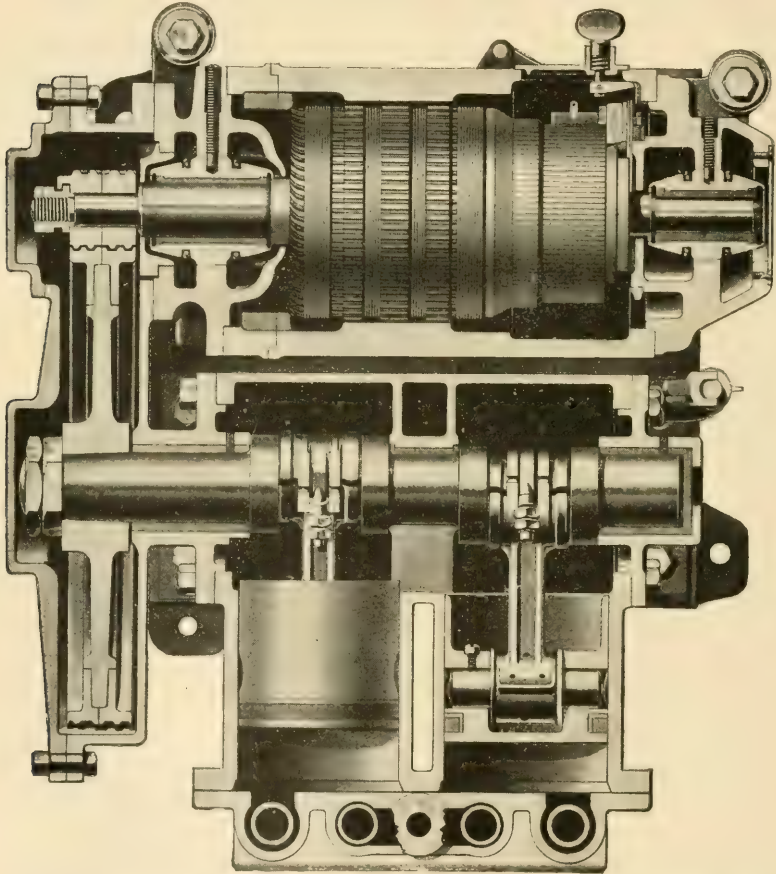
HORIZONTAL SECTION THROUGH A COMPRESSOR WITH MOTOR AT SIDE OF CRANK CASE
